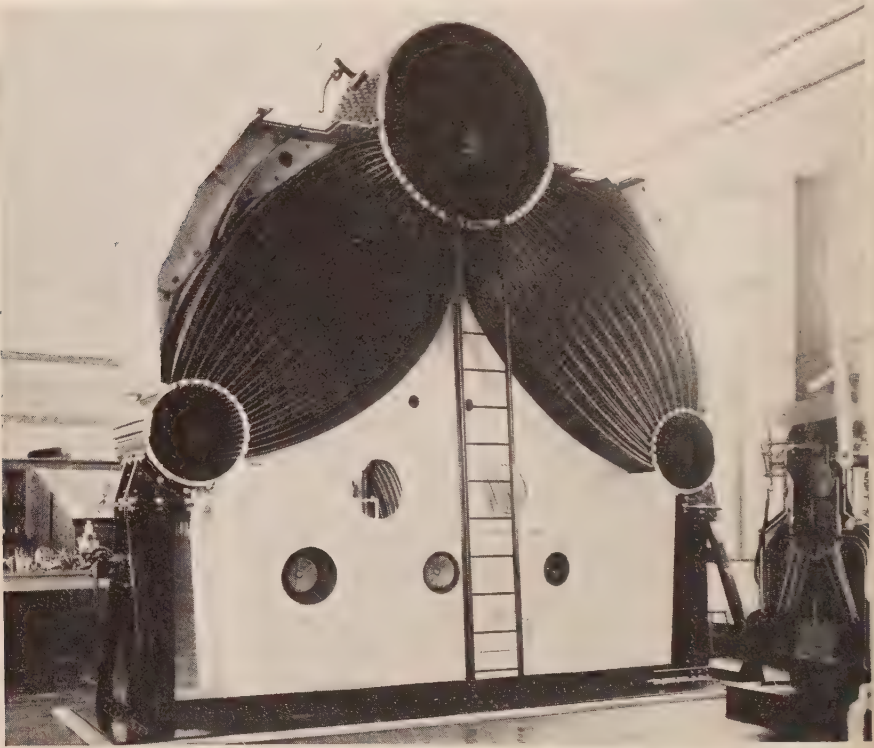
B. & W. Express-type Boiler, Rear View.
